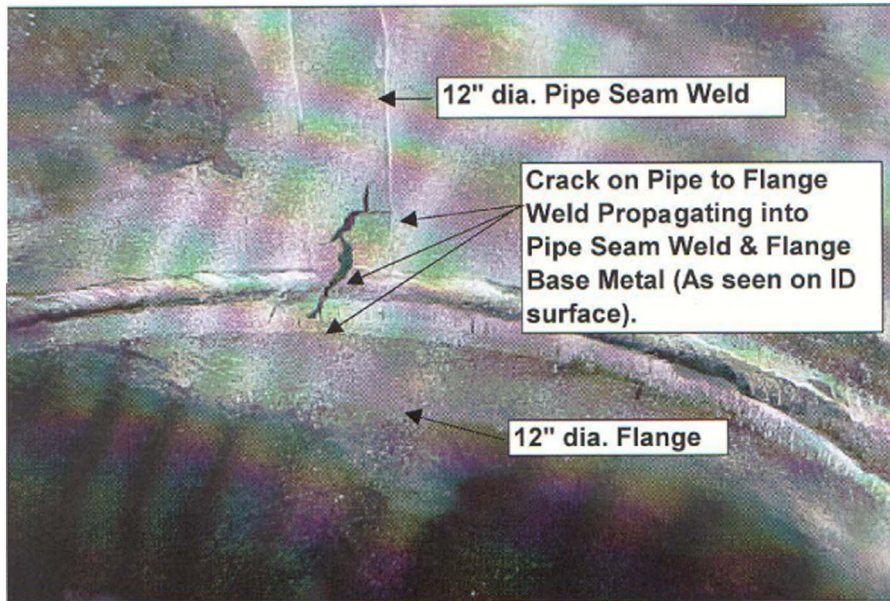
Photograph showing location and appearance of the crack found in the weld joint at the internal surface.
